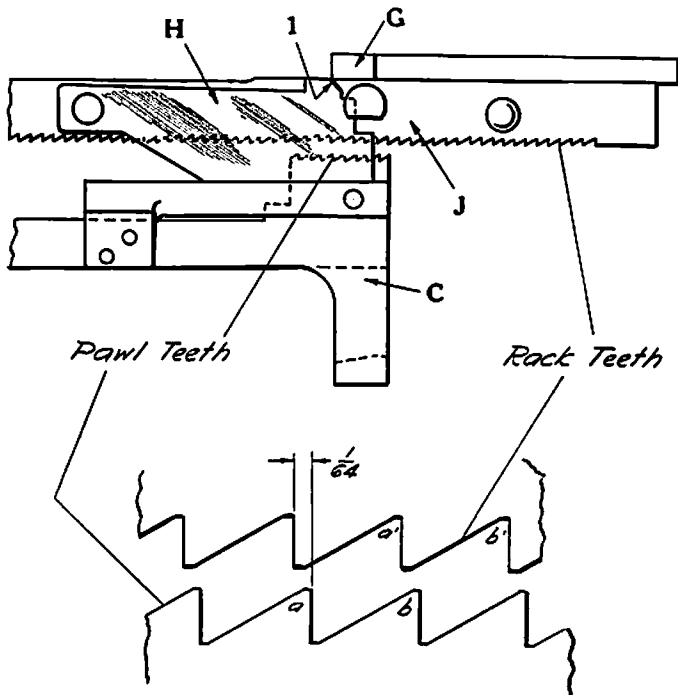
Detail view, showing the position of the justified quadding parts when the line spread and indentation rack gear lock is doweled in position.
